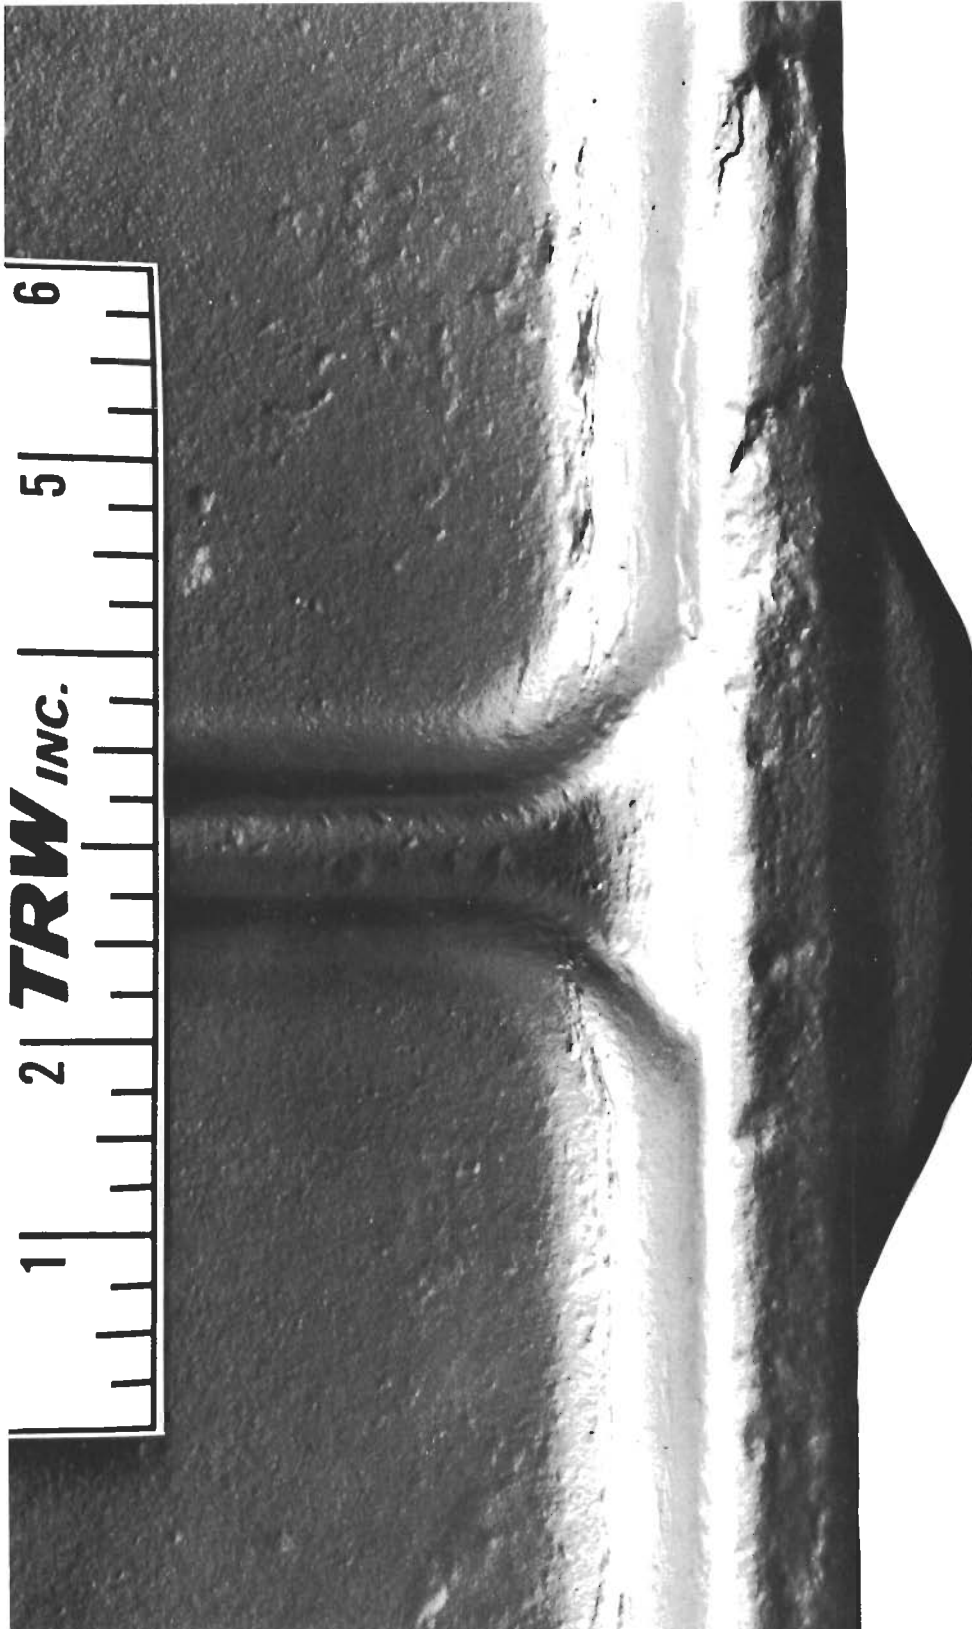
Indications of the Initiation of Laps at Fillet and Corner Radii on the Lower Die Side of the Sixth Ti 6Al-4V Bulkhead Forging Produced (of Seven Forgings Total, the Fifth of the Five Delivered to TRW) with the 50,000 Ton Hydraulic Press.
